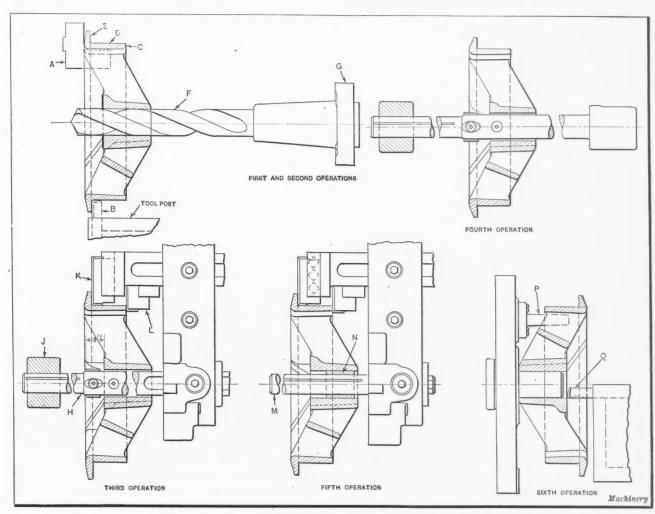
Turret Lathe Tooling Equipment used in machining Piston-valve Follower shown in Fig. 1
